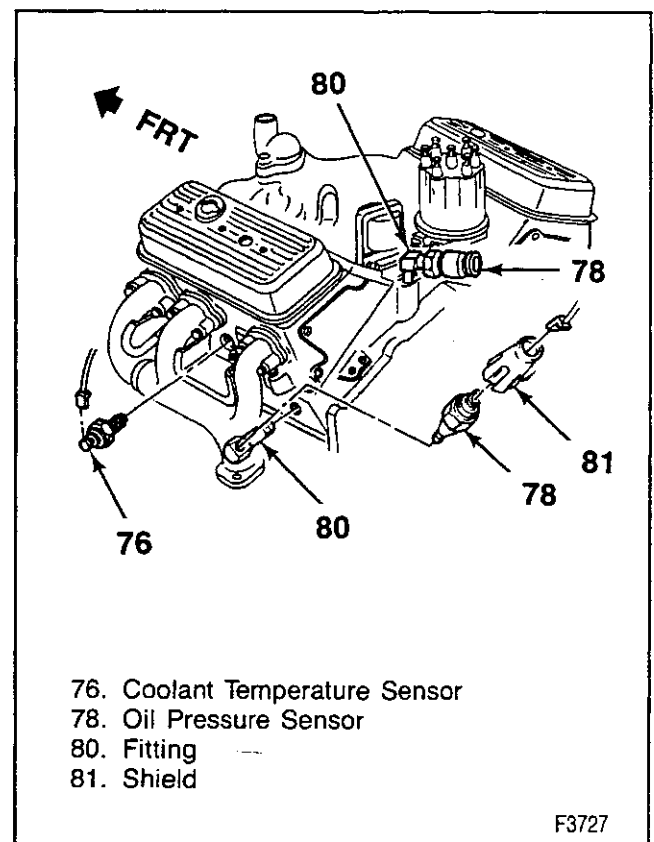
Coolant Temperature and Oil Pressure Sensors (4.3L VIN Z)
